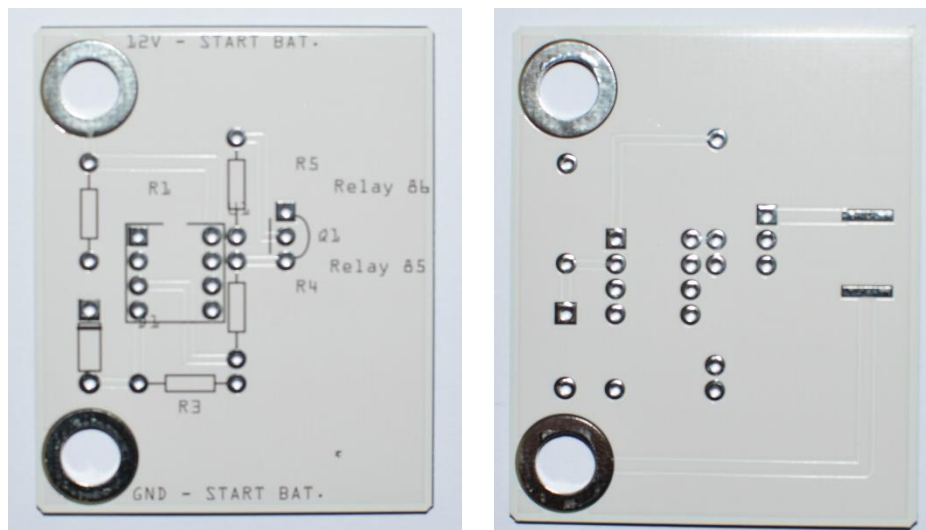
PICTURE OF PCB PRE SOLDERING
